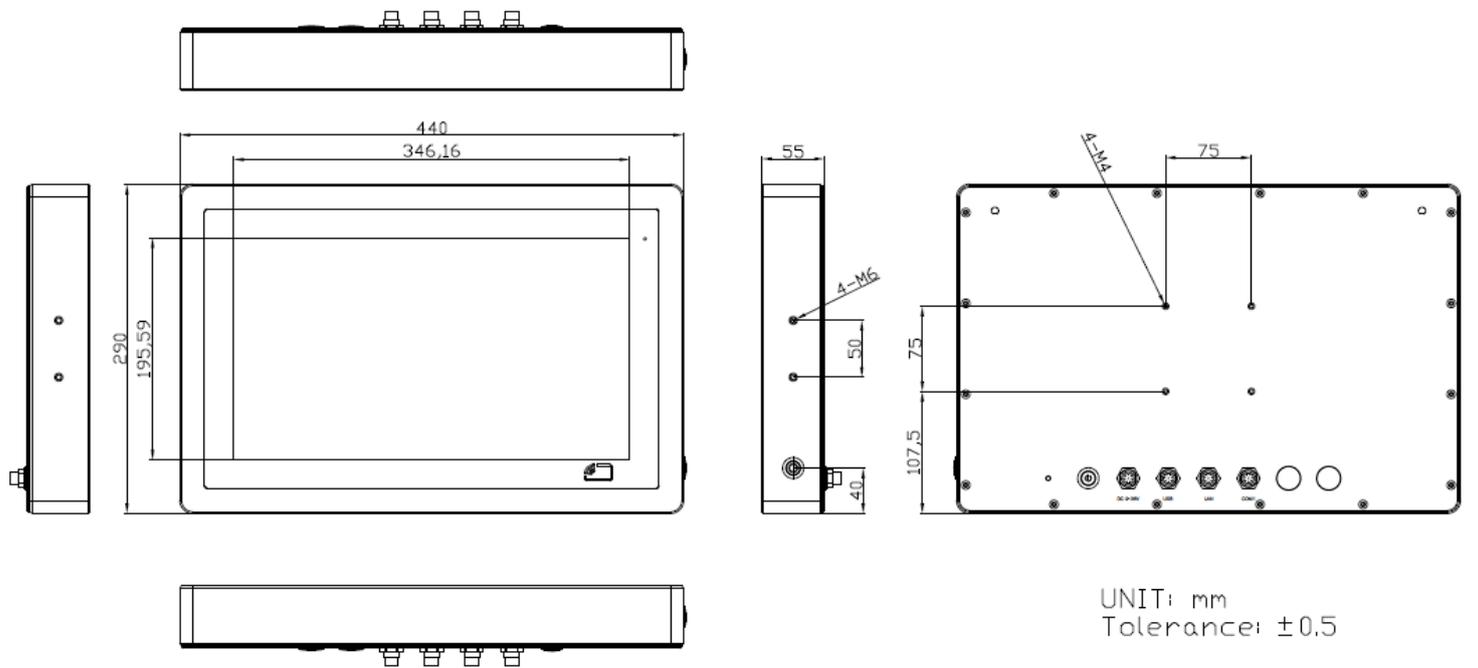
Dimensions of VITAM-916BP/R(H)
